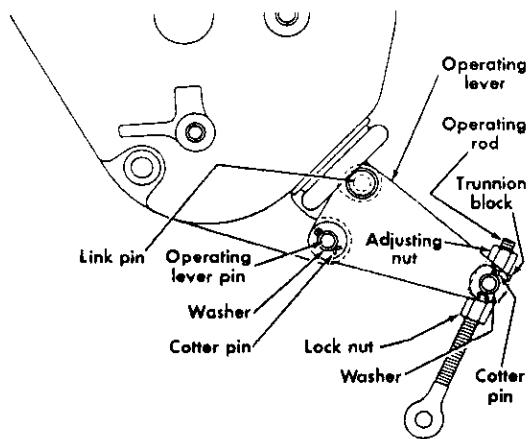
View showing brake adjuster on Series 354, 364, 384, 424, 444, 2424, 2444 and late B-414 tractors.
